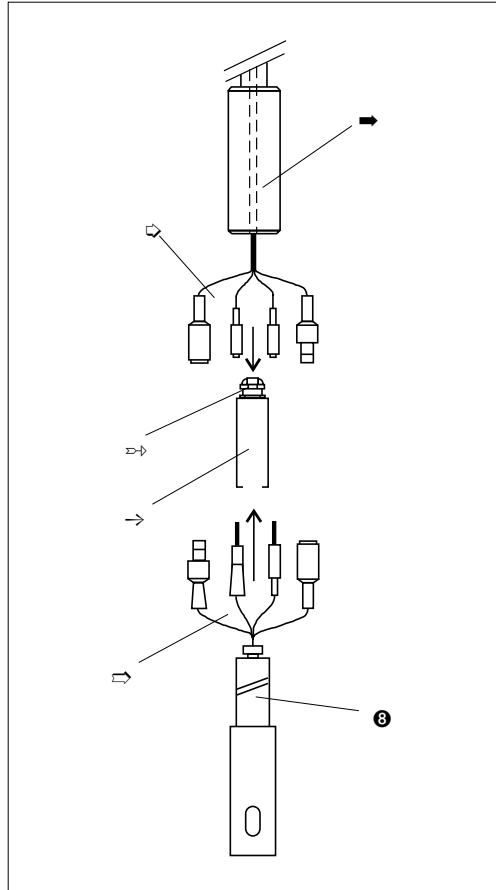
Cable connection and assembling of sensor for immersion versions
